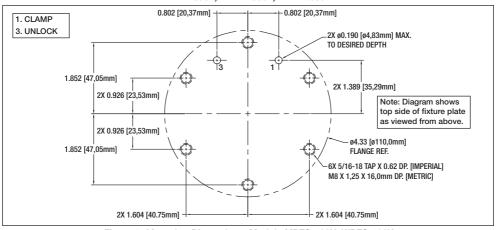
, Mounting Dimensions, Models MPFS-100V, WPFS-100V
